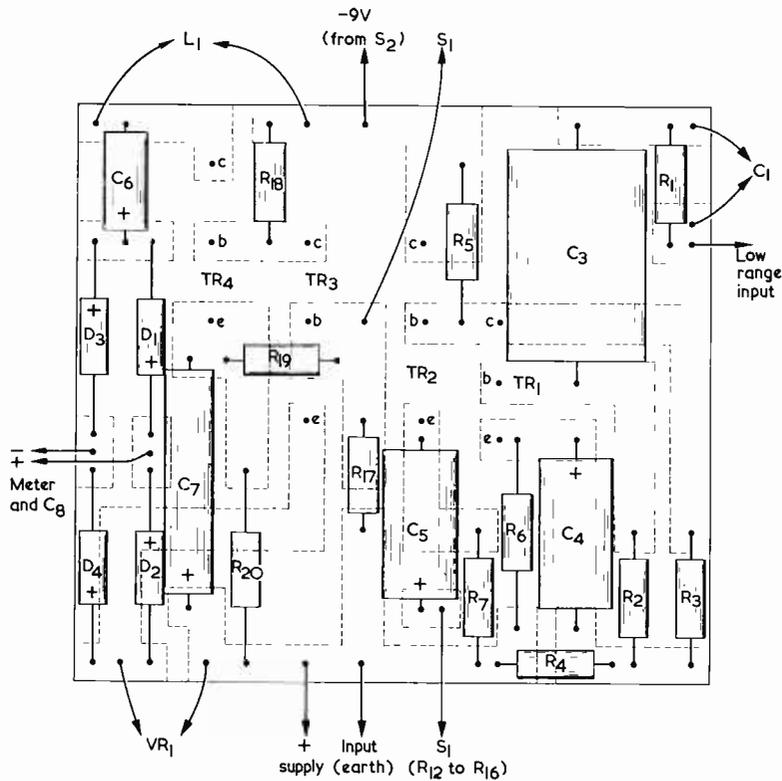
The component side of the board with components mounted. Also shown are lead-out wires from the circuit external to the boards
